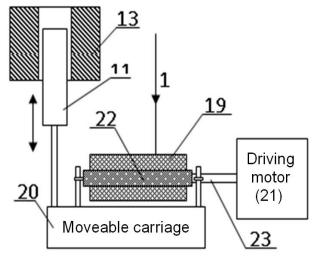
The winding electric drive with the bobbin and the moveable carriage
